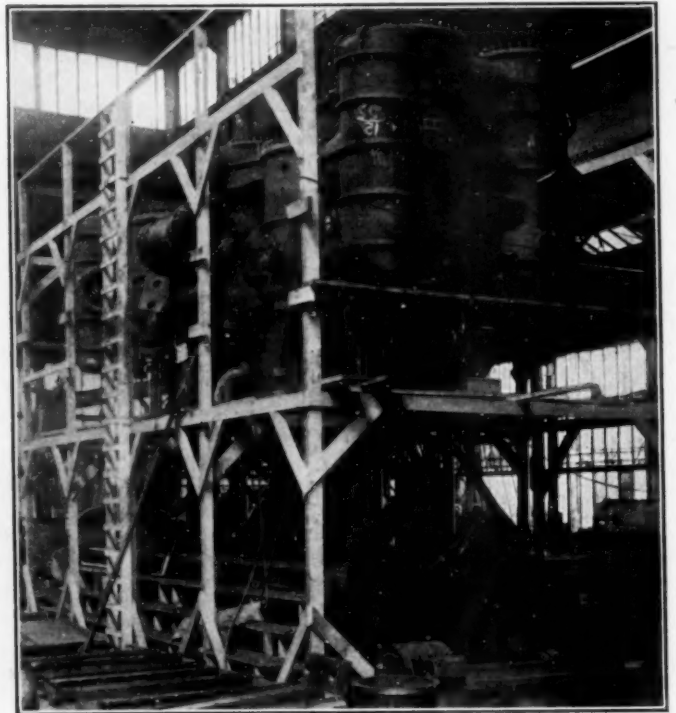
THE ENGINES OF THE NEW YORK FULLY ASSEMBLED AND READY TO BE INSTALLED IN THE SHIP.
